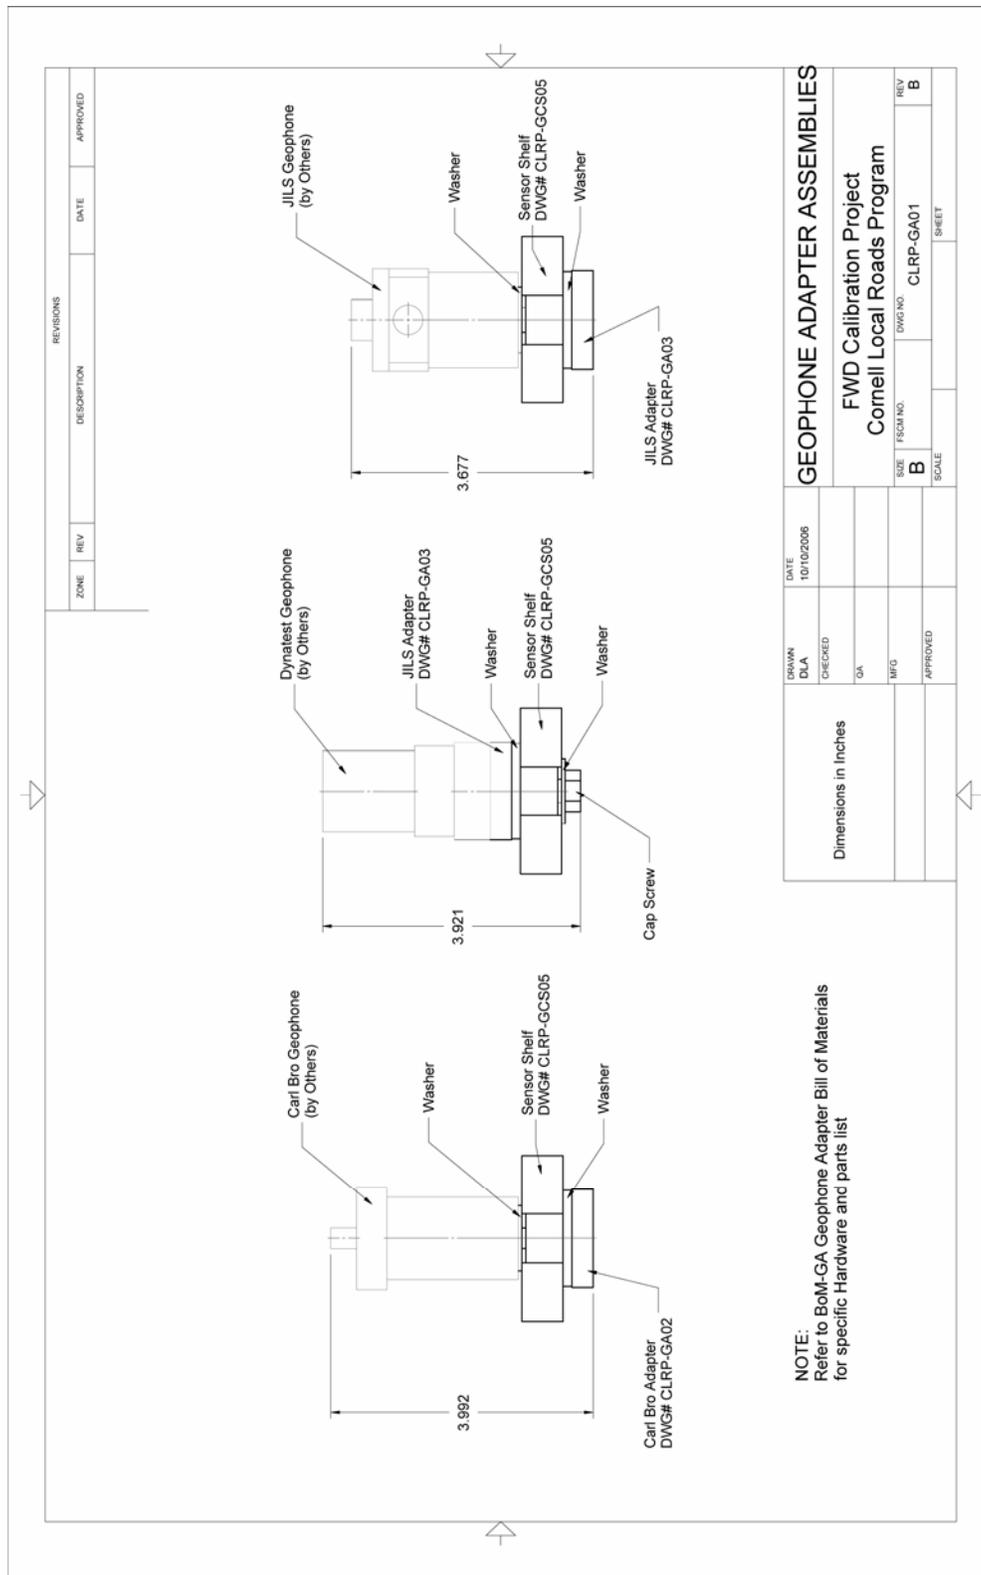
Drawing. CLRP-GA01 Geophone Adapter Assemblies.
